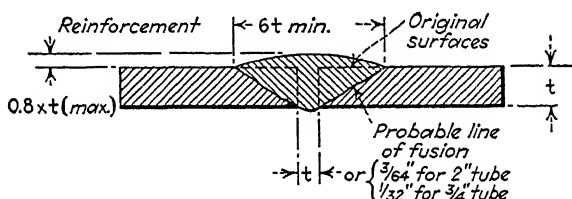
Typical airplane weld in cross section with dimensions for guiding designer.
